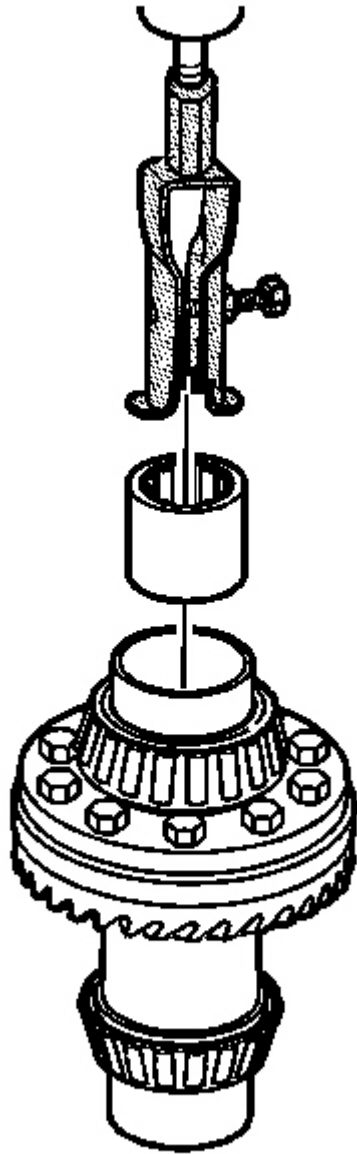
Removing Stub Shaft Inner Bearing From Carrier Bore
